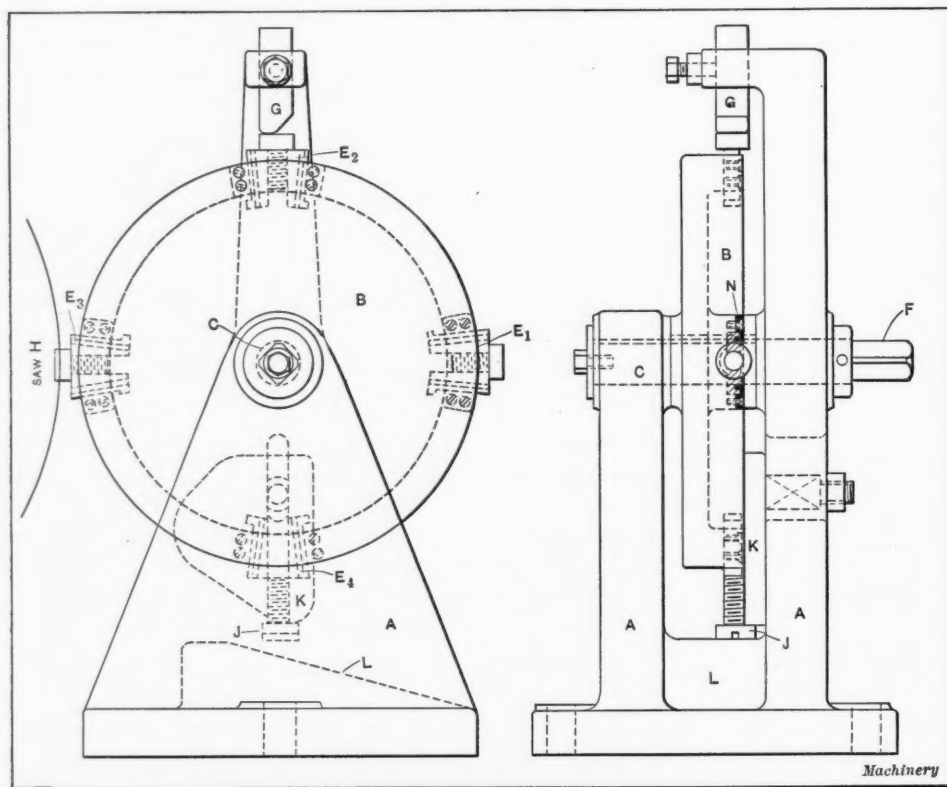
Attachment for sawing slots in Cheese-head Screws
